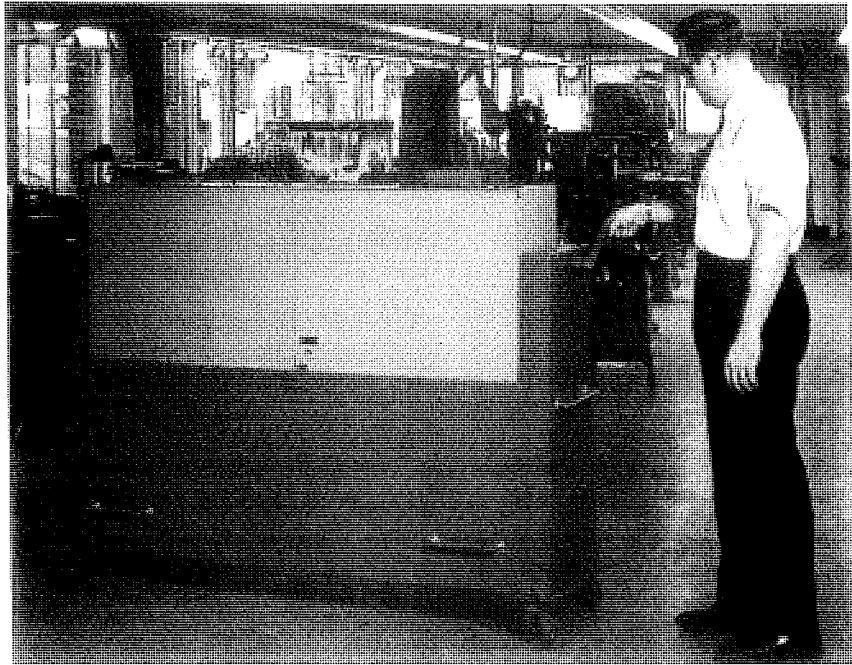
Shows procedure for cranking to raise machine to upright position.
